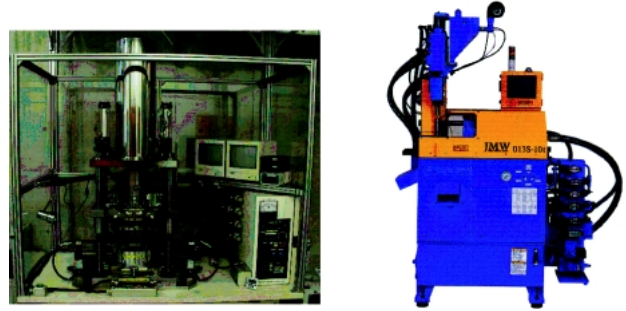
Outer appearance of the molding apparatus. Left one (manufactured by Engineering System Co., JAPAN) is for hot embossing⁴²⁾ and right one is for injection molding (manufactured by Jyukuken Machine Works Co., JAPAN).
